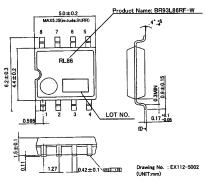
(b) PHYSICAL DIMENSION SOP8(BR93L86RF-W)
